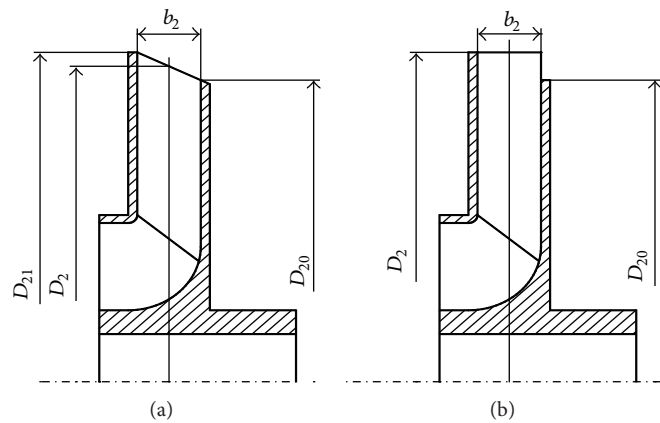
Two cutting proposals: (a) cutting blade outer edge and hub plate and (b) keeping blade and cutting hub plate.
